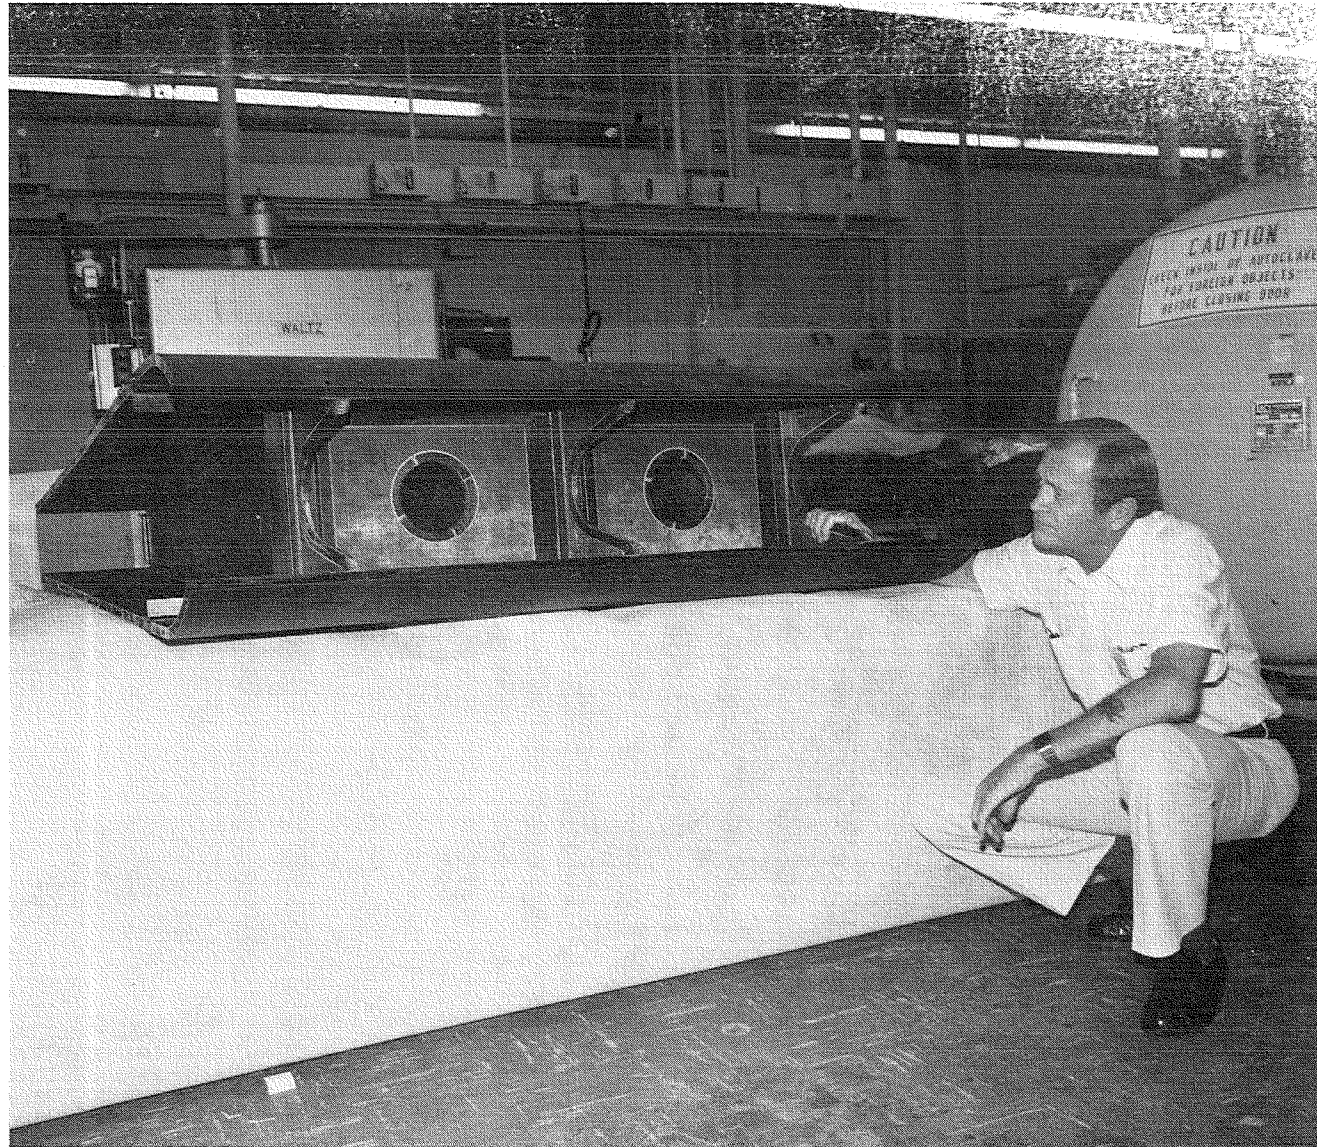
Completed Technology Demonstrator Segment Bonded Assembly
